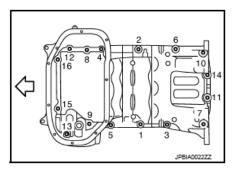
Identifying Oil Pan (Lower) Mounting Bolts With Tightening Sequence Courtesy of NISSAN NORTH AMERICA, INC.
